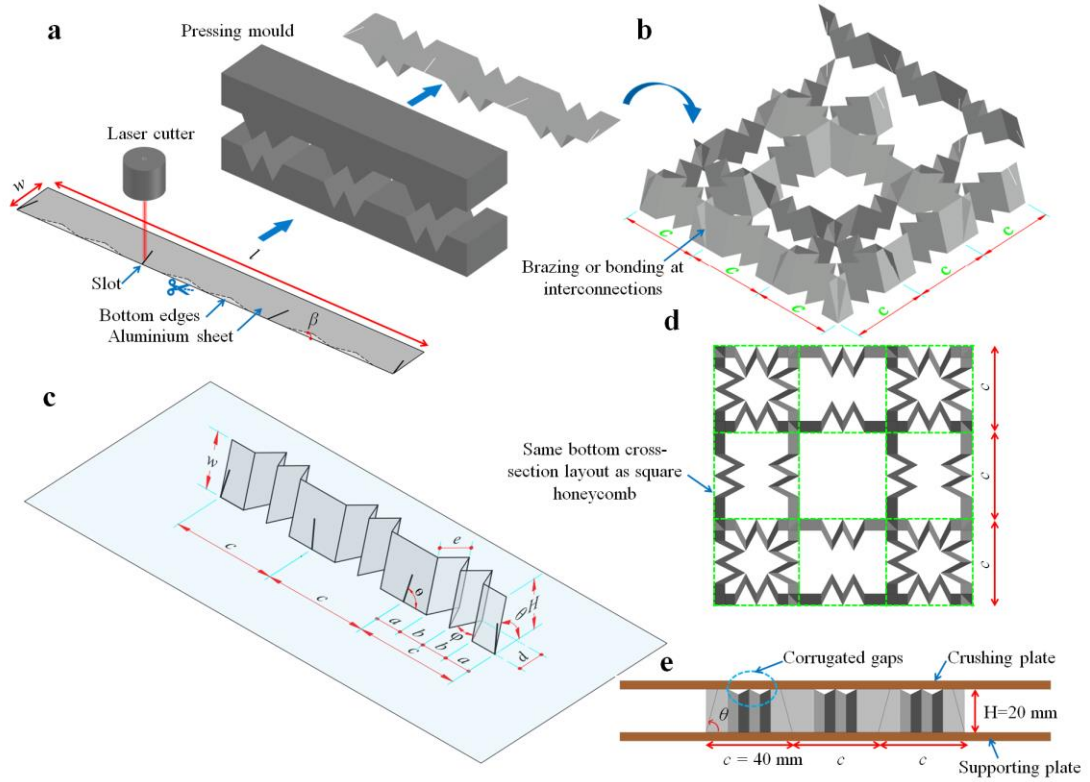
Details of the CTH core showing (a) corrugated plate fabrication process, (b) assembling of core, (c) details of corrugated plate, (d) top view, and (e) side view of core.
